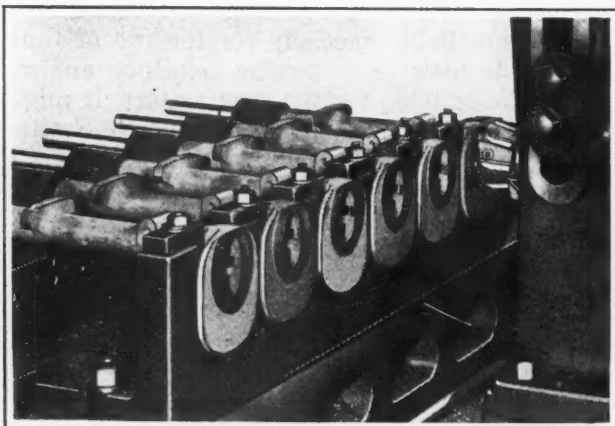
Milling Cast-iron Pump Bodies at a Surface Speed of 280 Feet per Minute
